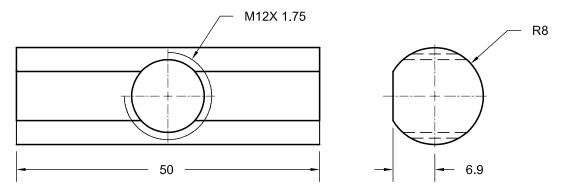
Orthographic views and dimensions of Jack Pin with thread
